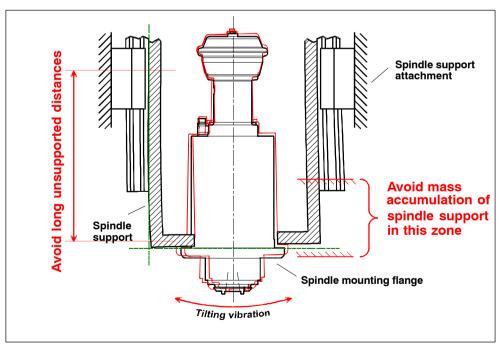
Example: Tilting vibration for an extended spindle mounting flange
